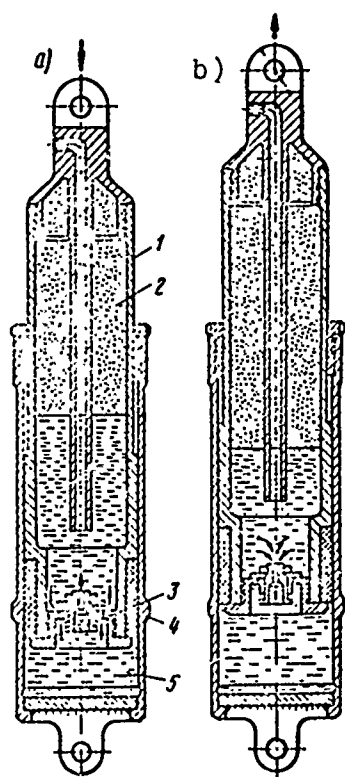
Diagram of operation of the landing gear shock absorber: a) forward stroke; b) return stroke; 1 - rod; 2 - compressed air; 3 - valve nut; 4 - cylinder; 5 - fluid.
